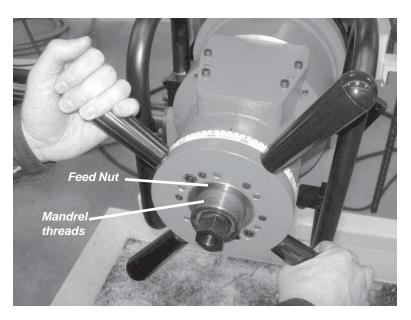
Turn the feed handle clockwise to engage the mandrel threads in the feed nut.
